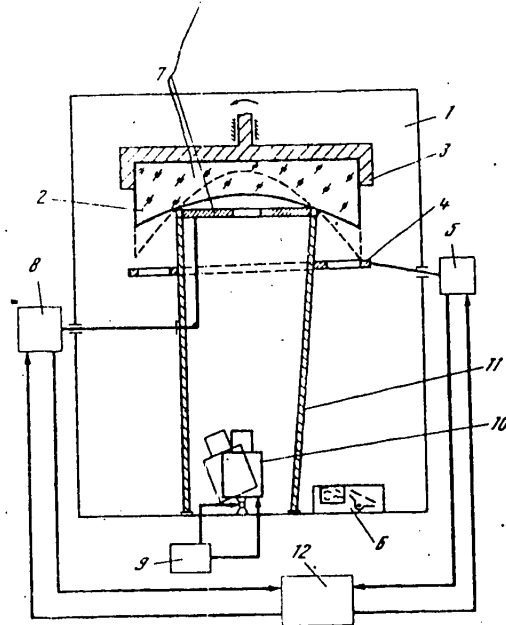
Device for shaping the surface of an optical part in a vacuum. 1 -- vacuum chamber, 2 -- part, 3 -- collet, 4 -- deposition mask, 5 -- mask control, 6 -- electron evaporator, 7 -- spraying mask, 8 -- mask control, 9 -- ion source control, 10 -- ion source, 11 -- shield, 12 -- programming device.
